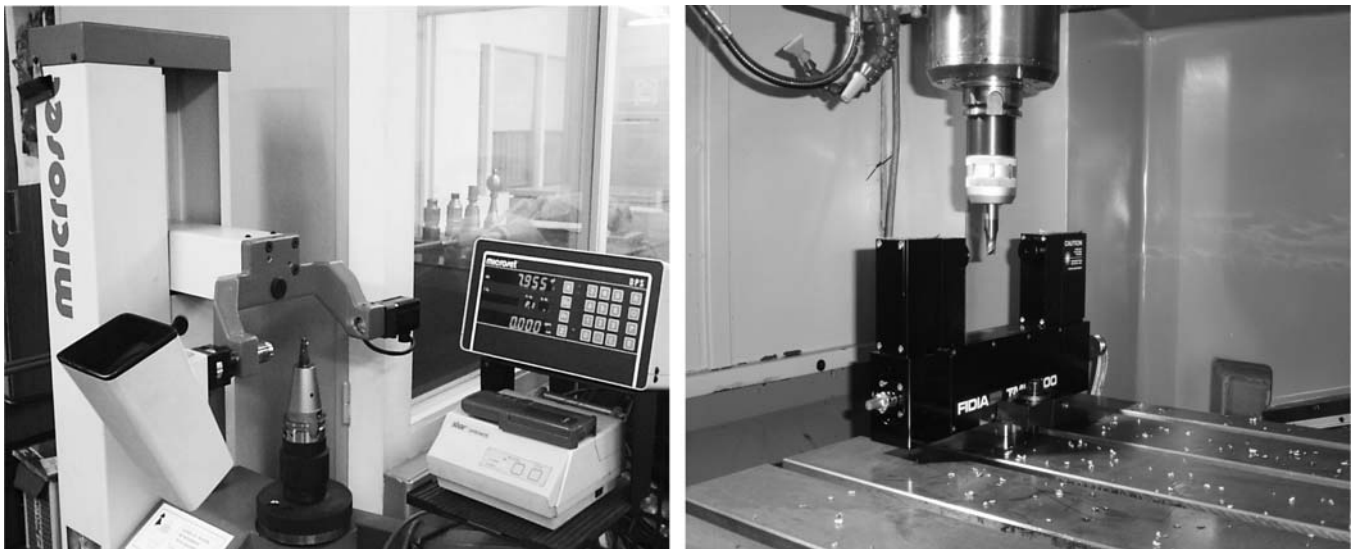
Left – tool pre-setting machine; right – tool measurement system (TMS)
